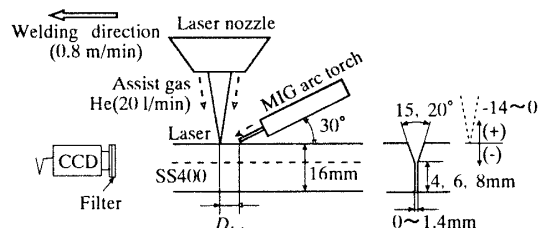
Experimental setup of Laser-Arc Combination welding
